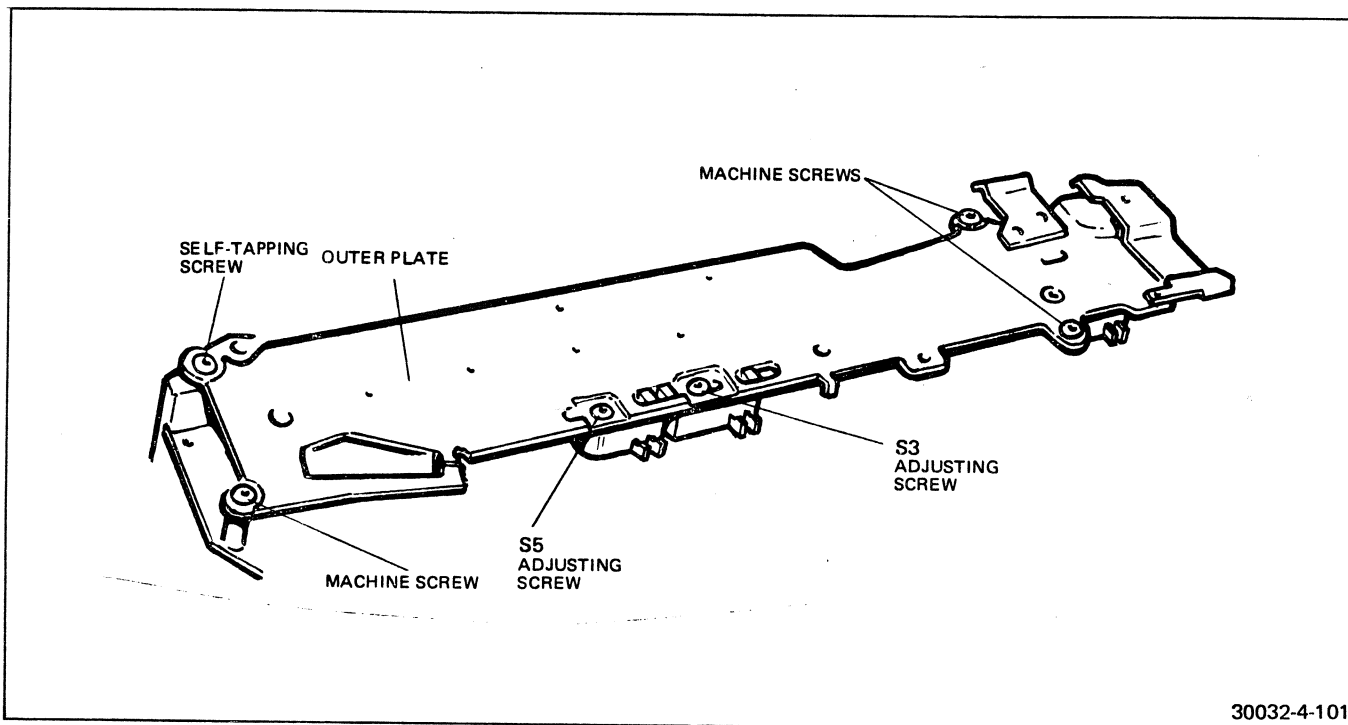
OUTER PLATE MOUNTING SCREWS
